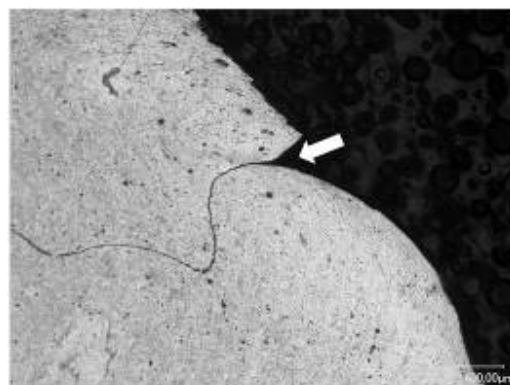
Magnified view of intersection of JLR and fracture surface (see dashed rectangle in Fig. 5)
